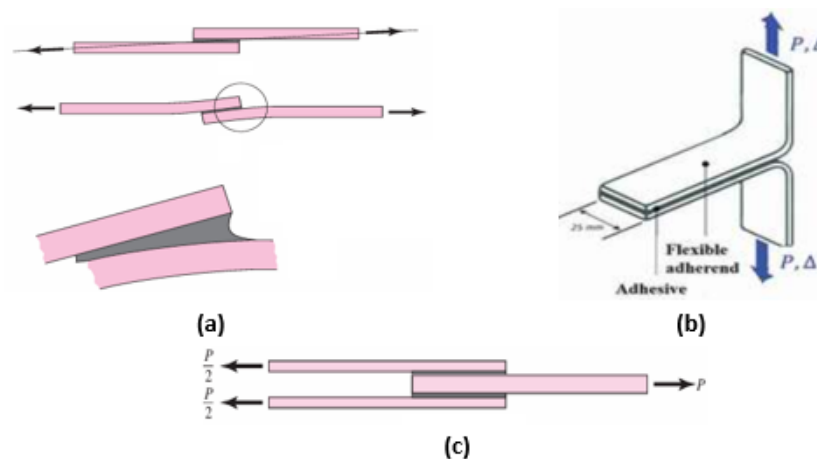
Single shear test (a), peel test (b), and double shear test (c) (adapted from [50, 63]).
